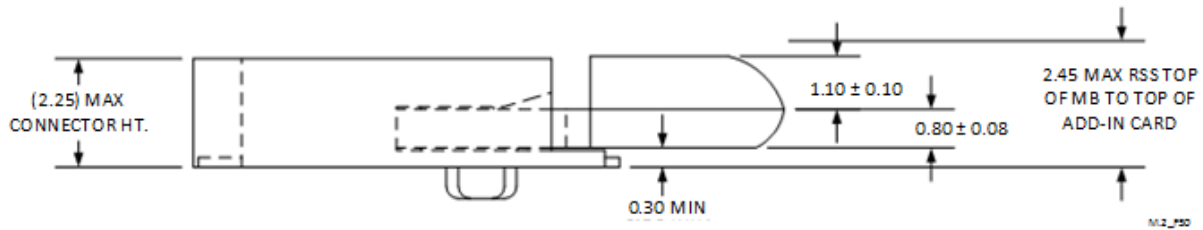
H2.3-S1 - Stack-up Top Mount Single-sided Add-in Card for 1.2 Maximum Component Height
